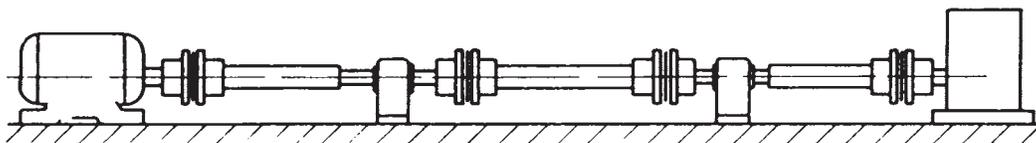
Full-floating and semi-floating shaft couplings with pillow blocks to bridge large spaces between driving and driven equipment.
